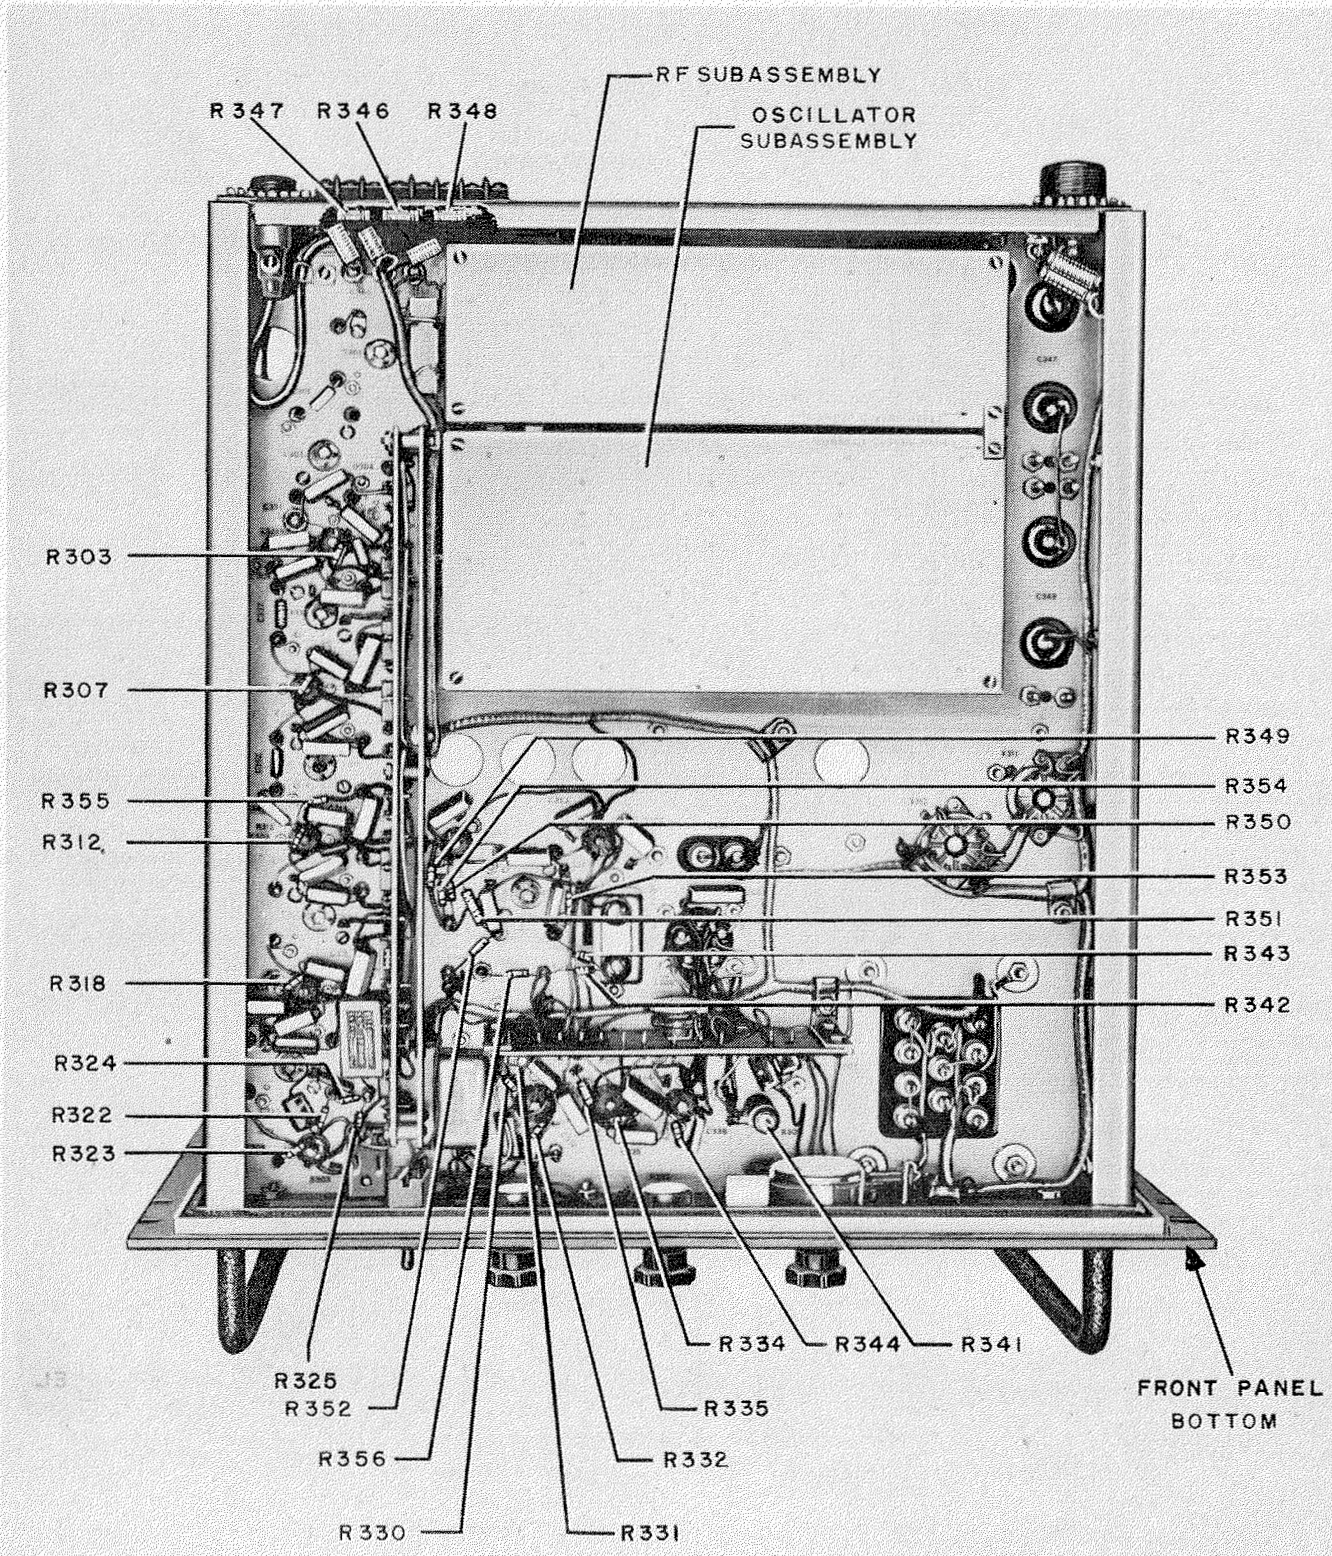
Radio Receiver R-361/GR, Bottom View, Location of Resistors on Main Chassis
